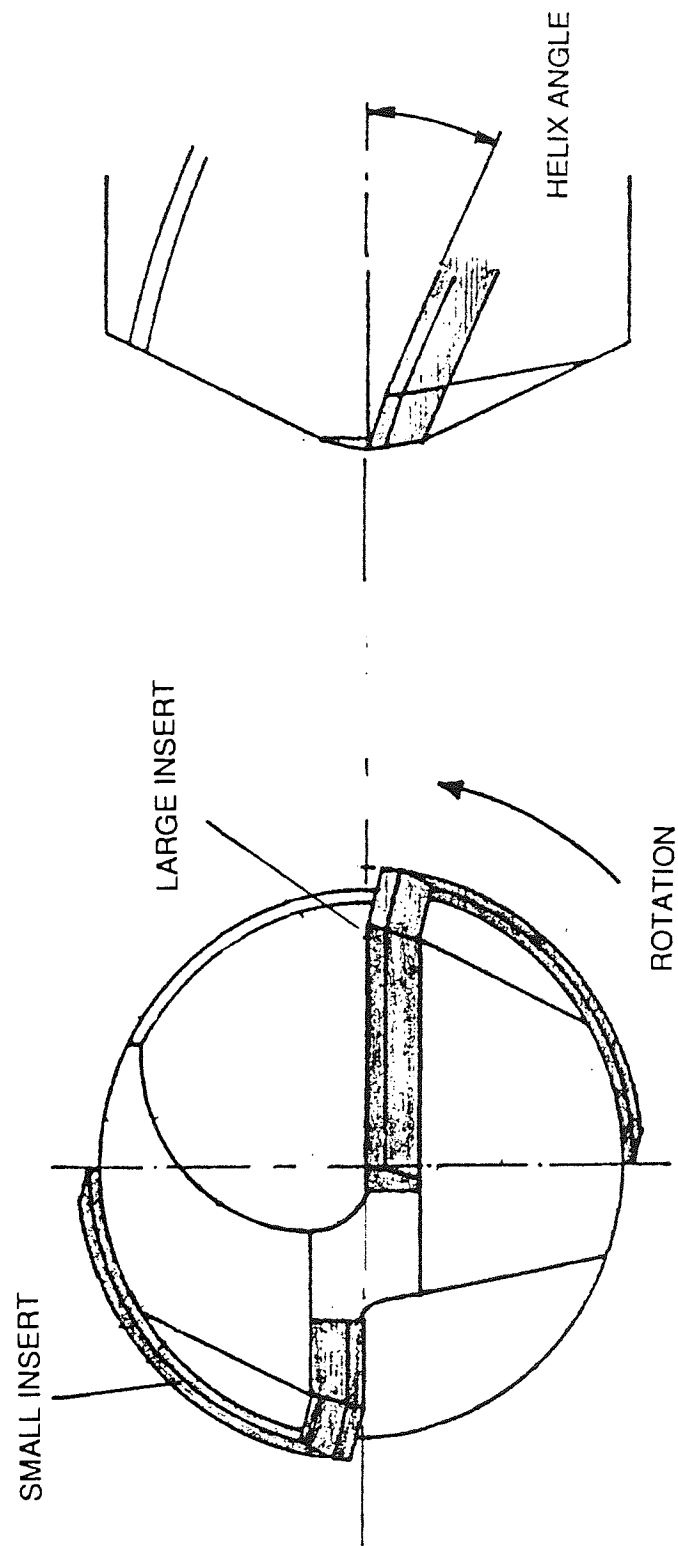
THE NEW PROTOTYPE DRILL - EARLY DESIGN SHOWING BRAZED IN
